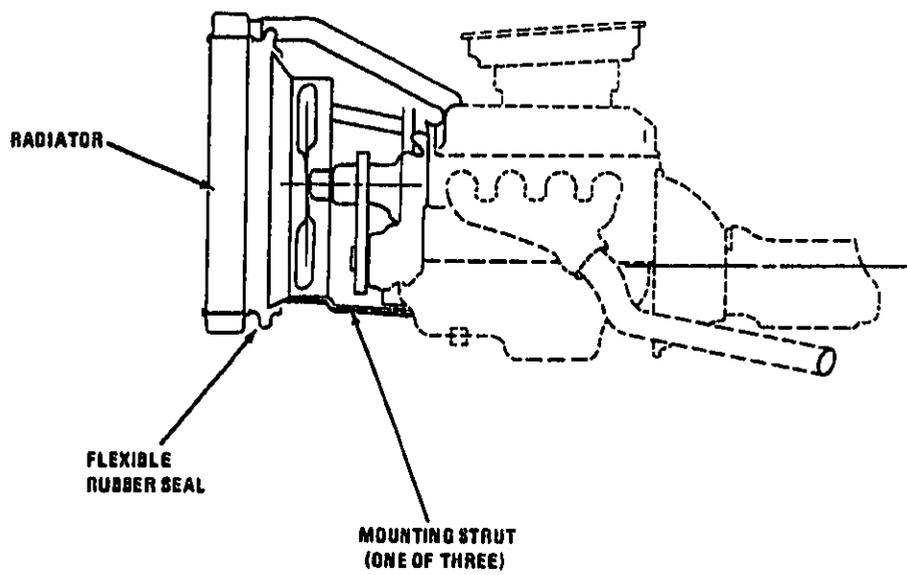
Engine-Mounted 1/4 Inch Tip Clearance Contoured Shroud
